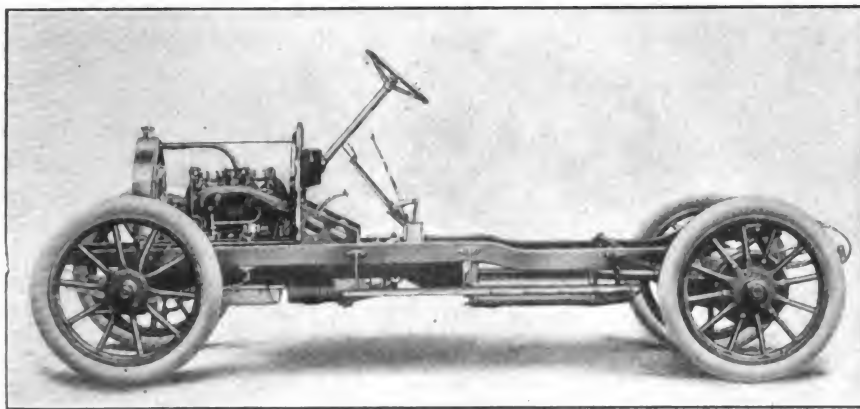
SHOWING A SIDE VIEW OF THE CHALMERS CHASSIS
